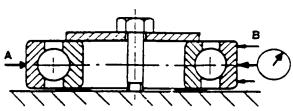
Test Bearing Internal Clearance Measurement.
